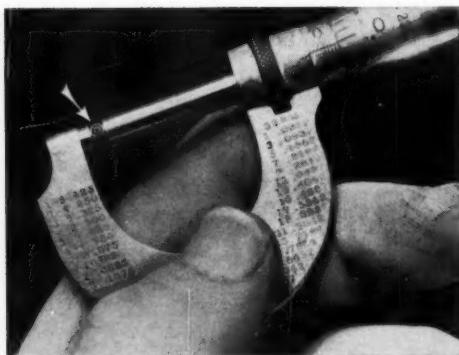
Miniature ball bearings such as this instrument bearing require lubricants that are absolutely clean of abrasive contaminants.
